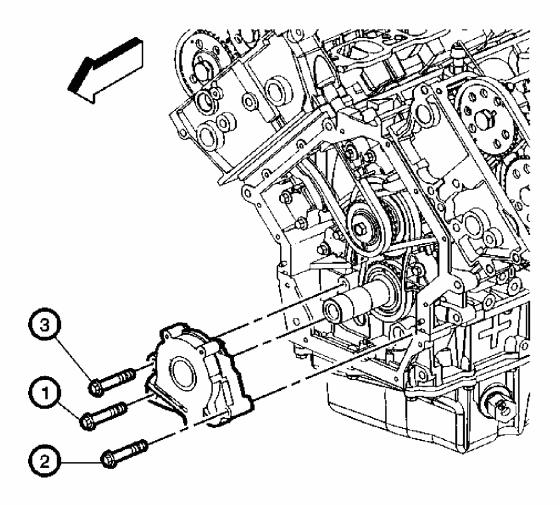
Identifying Oil Pump Assembly Retaining Bolts Courtesy of GENERAL MOTORS CORP.
